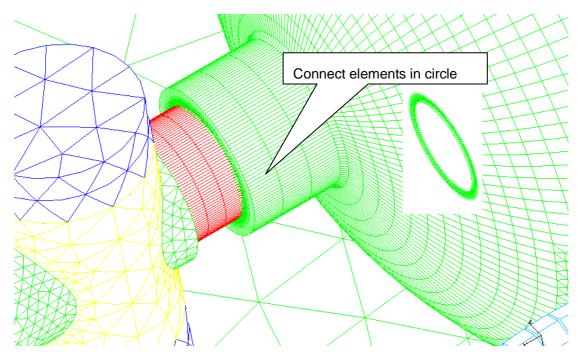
connect between Accumulator Assembly & Heater Pipe Assembly
